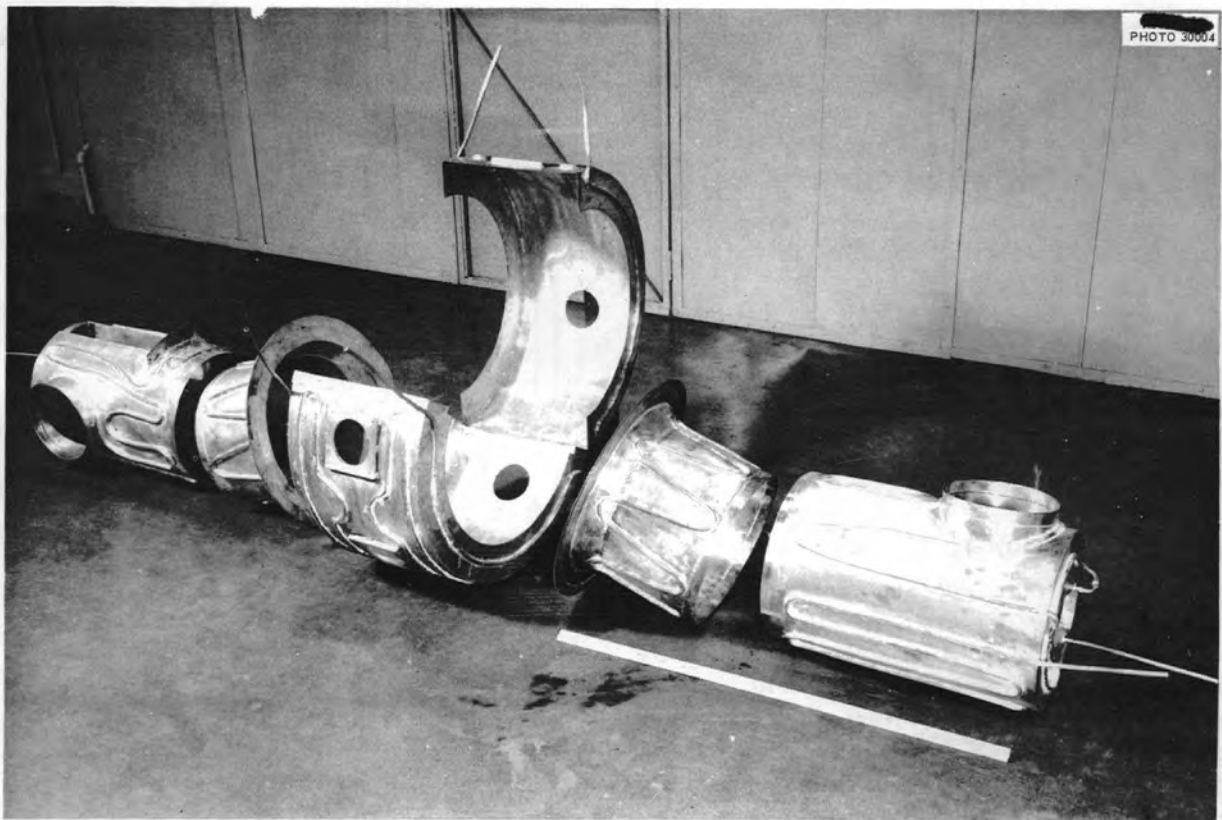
High-Vacuum Liner of DCX, Unassembled.
